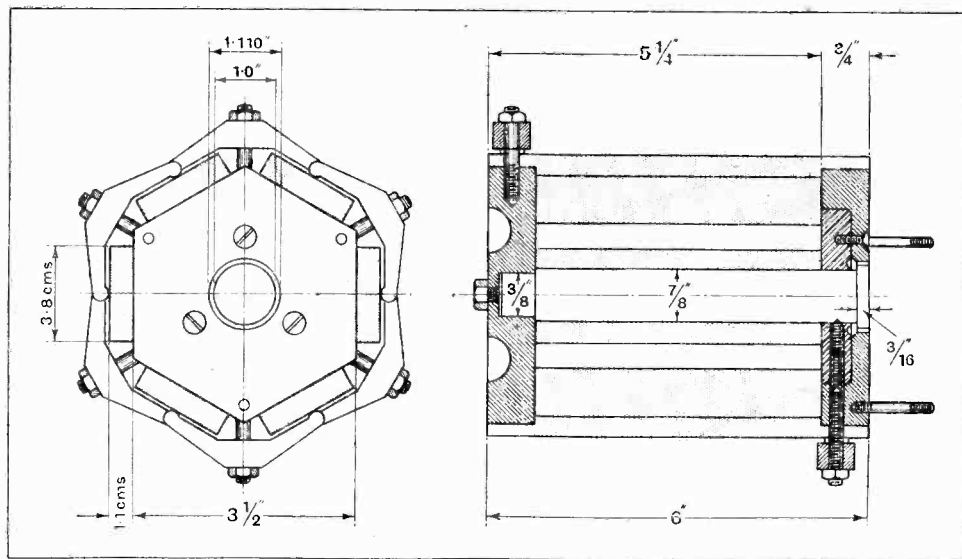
Leading dimensions of magnet assembly using straight bar magnets.
